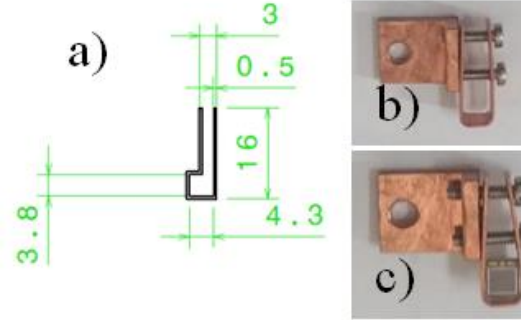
Cu clamp for KETEK 3x3 mm² device: a) drawing, b) empty Cu clamp and c) Cu clam with SiPM device (design and fabrication by mechanical engineers at LAL)
